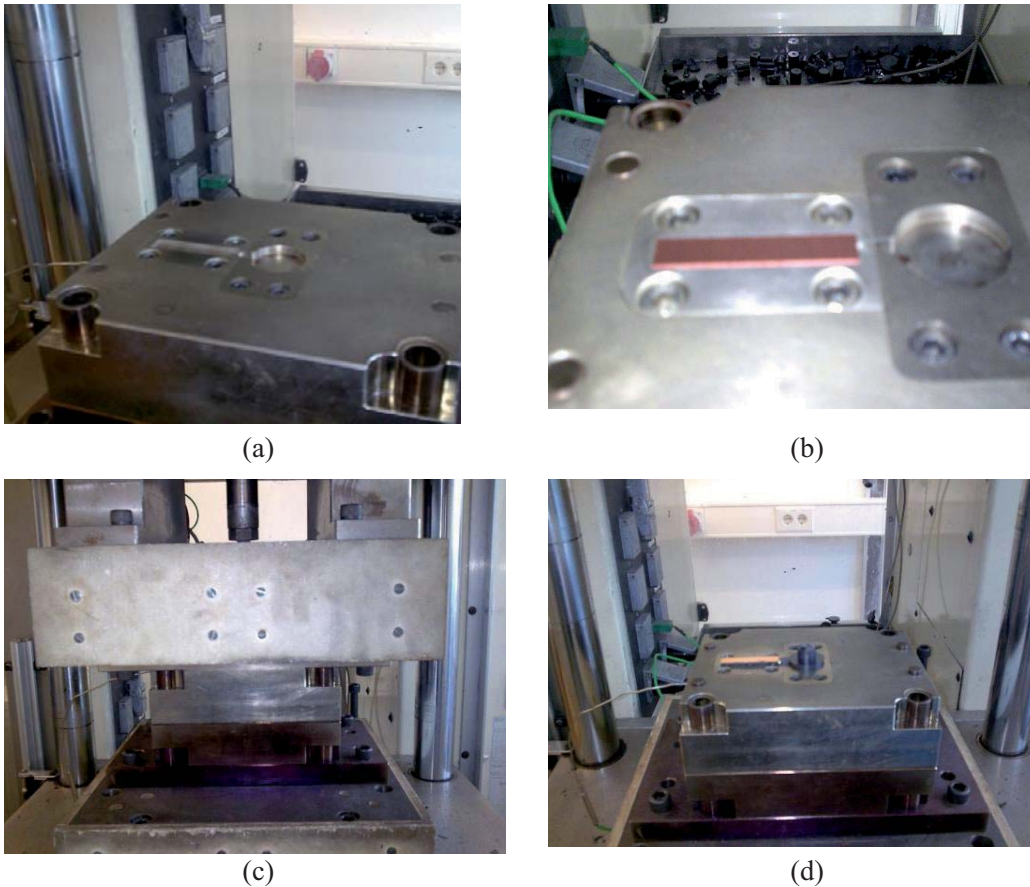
Transfer molding for fabricating Cu/EMC samples. (a) Mold form (b) Leadframe placed in the mold form. (c) Injection of EMC. (d) Release of the molded sample from the mold form.
